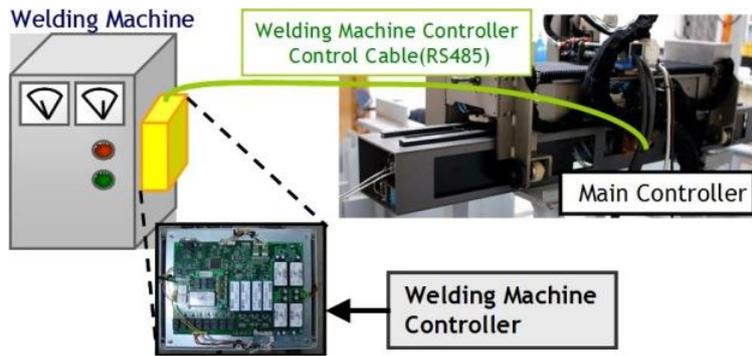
Connection between the welding machine controller and the main controller of RRX3.
